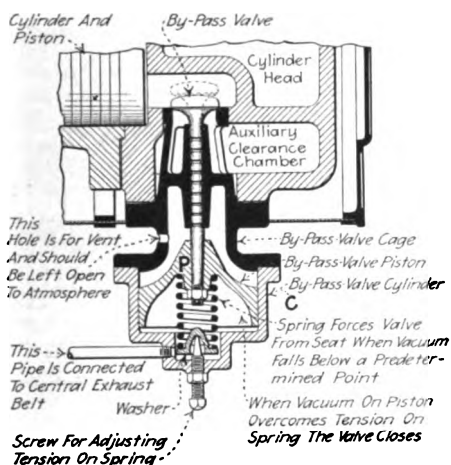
Section through automatic by-pass valve of Ames "una-flow" engine.
